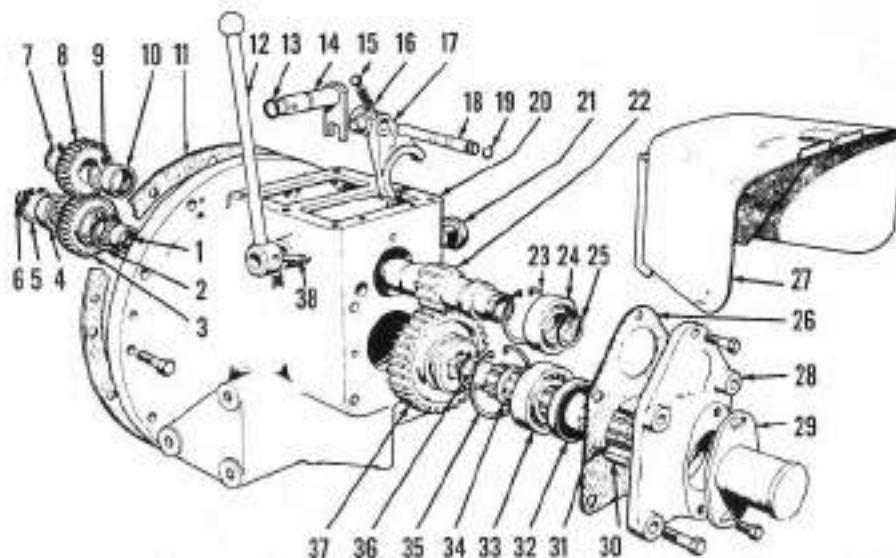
Exploded view of model 770 single-speed PTO housing and gear assembly. Hydraulic pump drive gear (8) on front end of input shaft (22) drives idler (3) mounted on front end of output shaft (31); idler drives hydraulic system pump. Shift lever (12) engages sliding gear (37) on output shaft with gear machined on input shaft (22).
